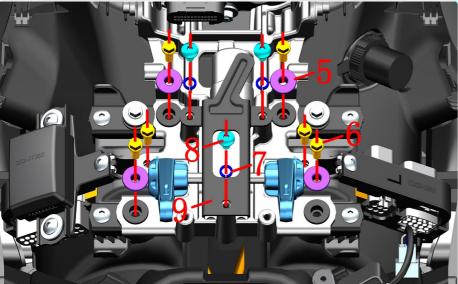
FRONT FORK		Windshield base assembly 1	CHK	(0)
